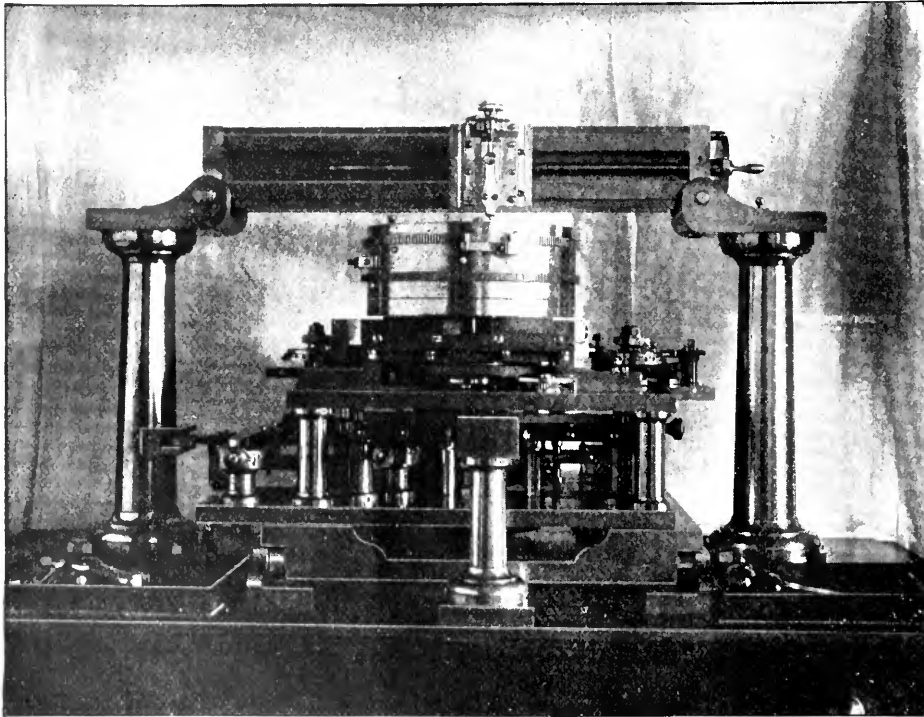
GEOMETRICAL LATHE. From "Paper and Press," by the kindness of W. M. Patton.
